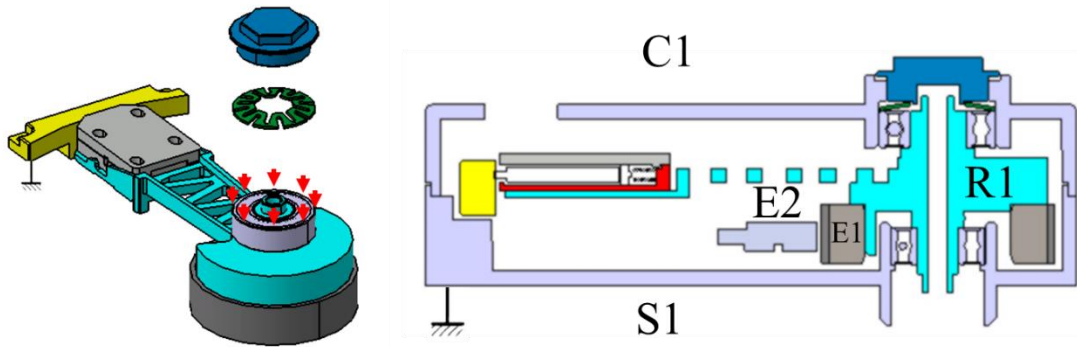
Bearing fitting on actuator's shaft and housing.
